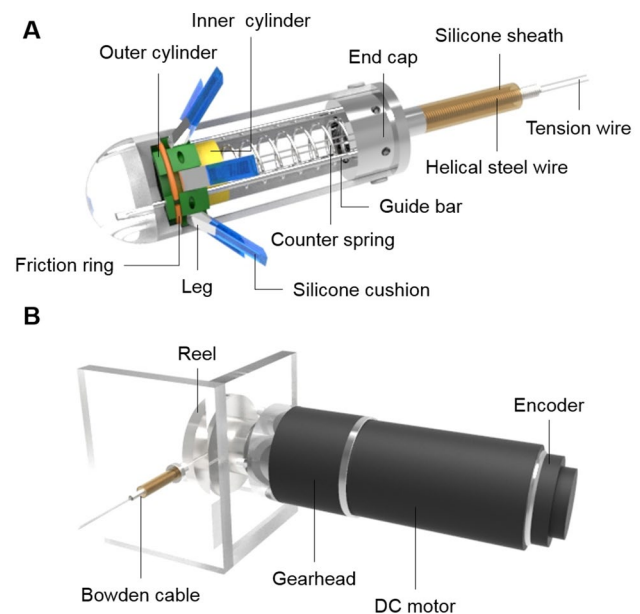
Schematic of the proposed robotic colonoscope. A Robotic colonoscope. B Reel controller
